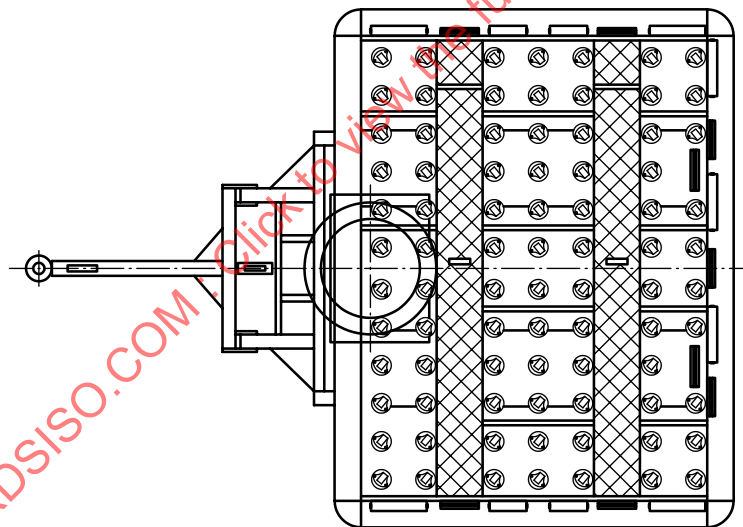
Container/pallet dolly, side towing, side/end transfer
